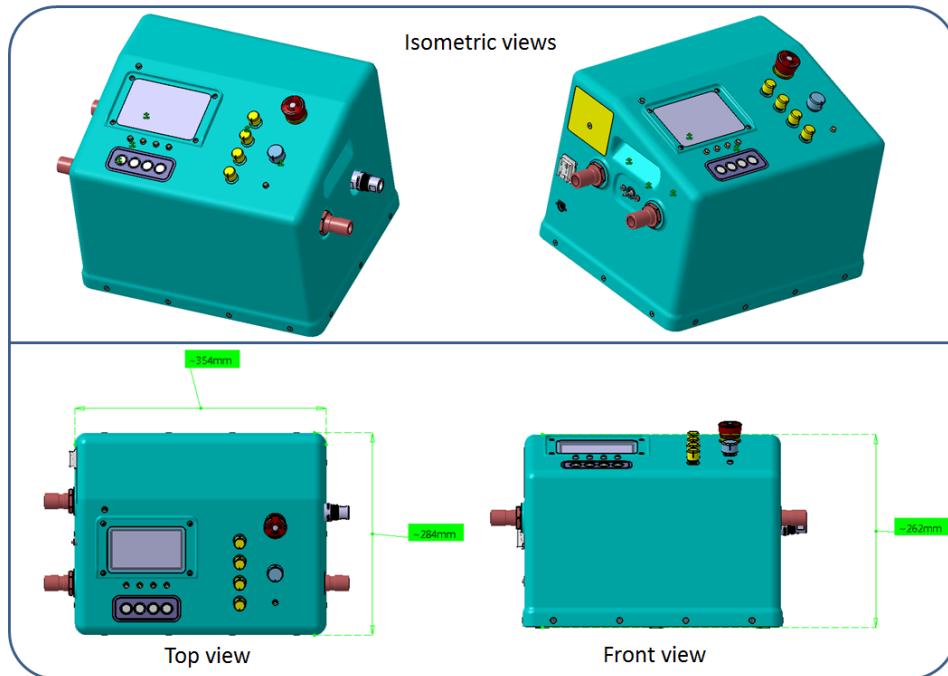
Isometric, top and front view of the mechanical enclosure of the FI5
